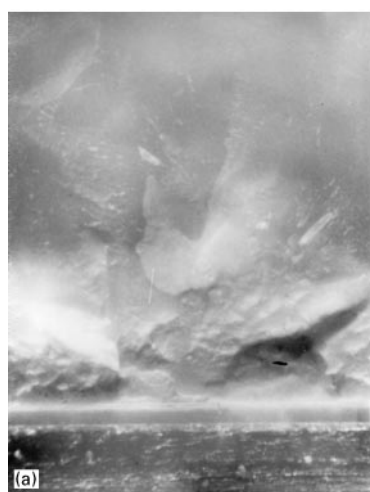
Typical fracture surface of J tested specimen showing three distinct zones: (I) machined notch, (II) sharp notch, and (III) fracture area.
